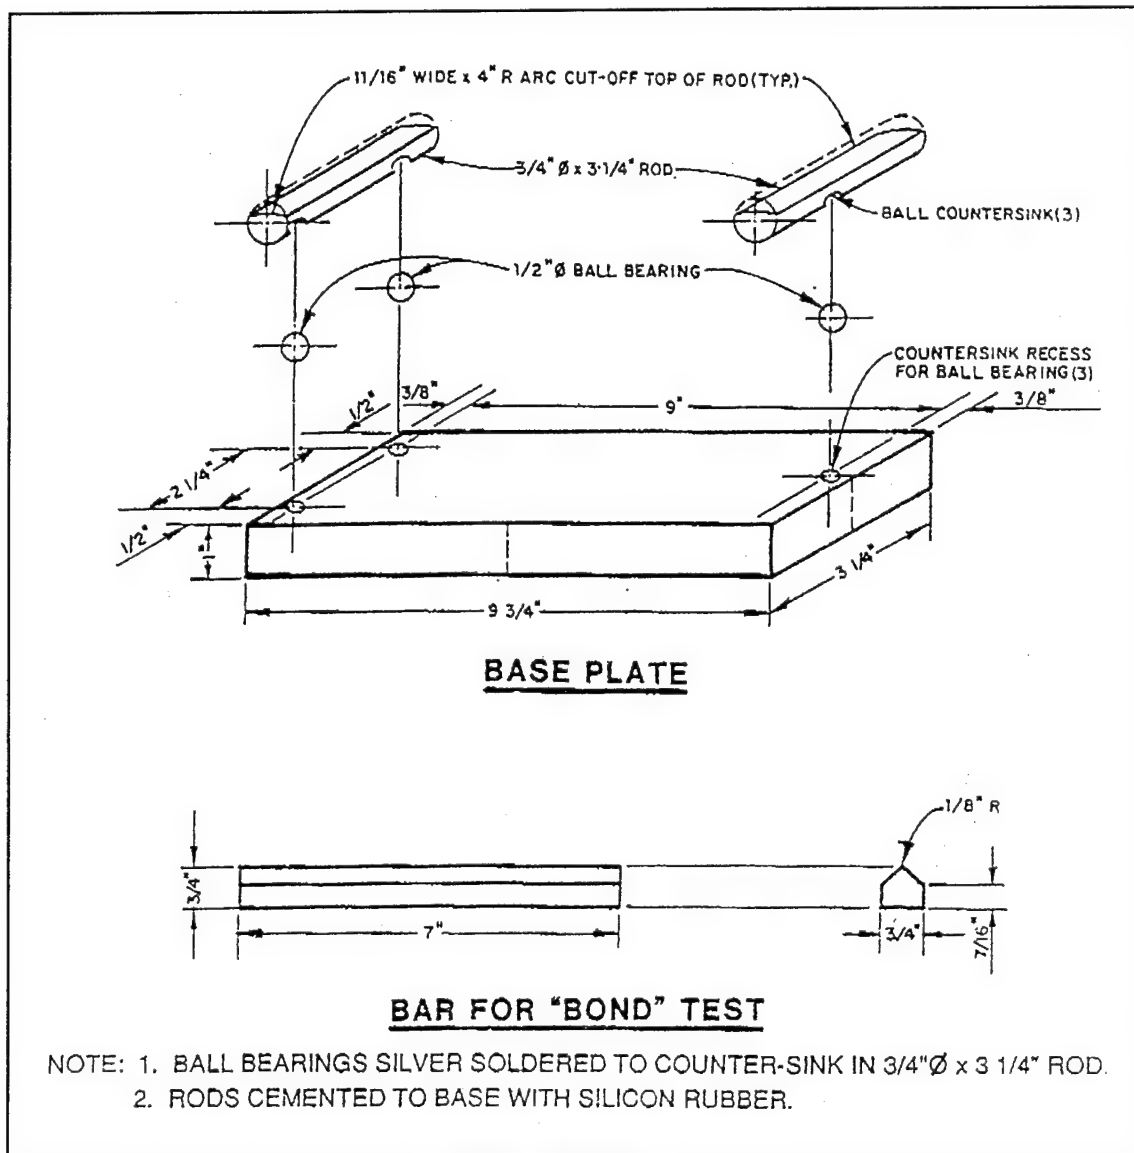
Plan of apparatus for bond test of concrete overlay and patching materials (Caltrans)
